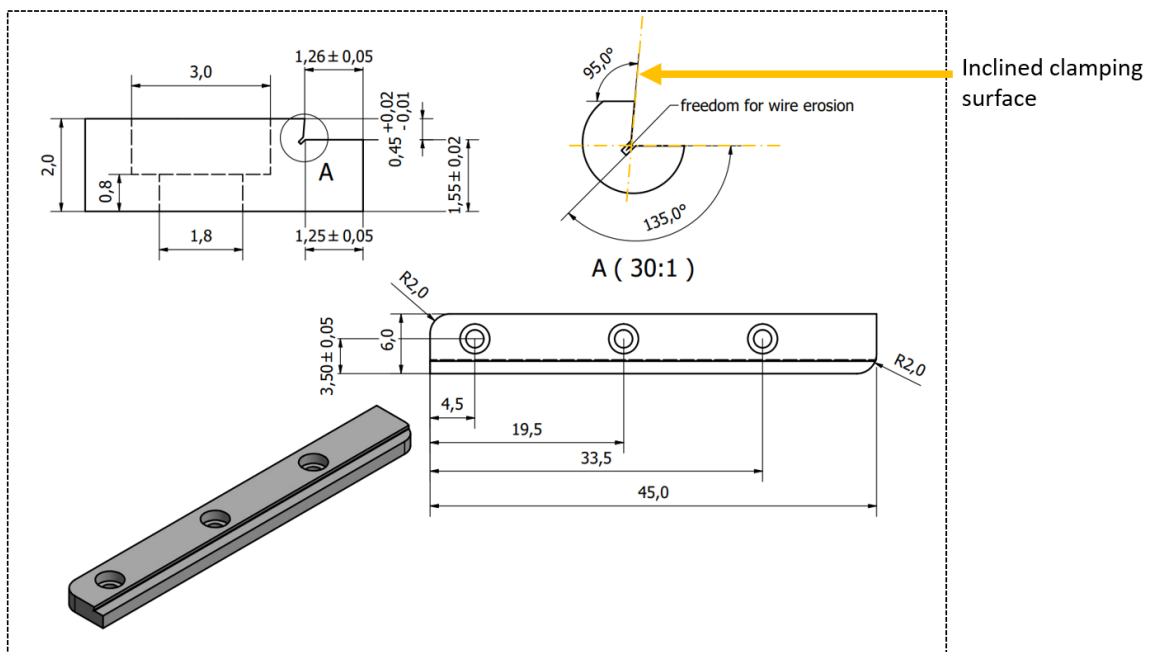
The technical drawing of the clamp specifies an obtuse angle of  $95^\circ$  between the clamping surface and the upper surface of the clamp. Technical note: wire erosion was used to machine accurately the clamping surface.
